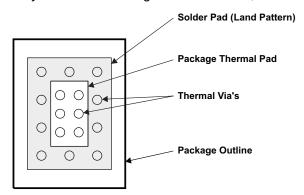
Package and PCB Land Configuration for a Multilayer PCB
